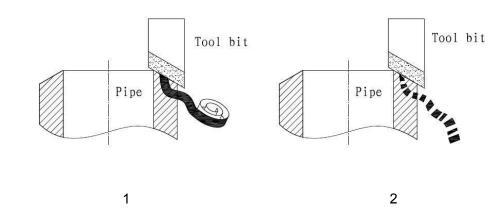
If tool bit is sharp, scrap-iron comes out in strips
